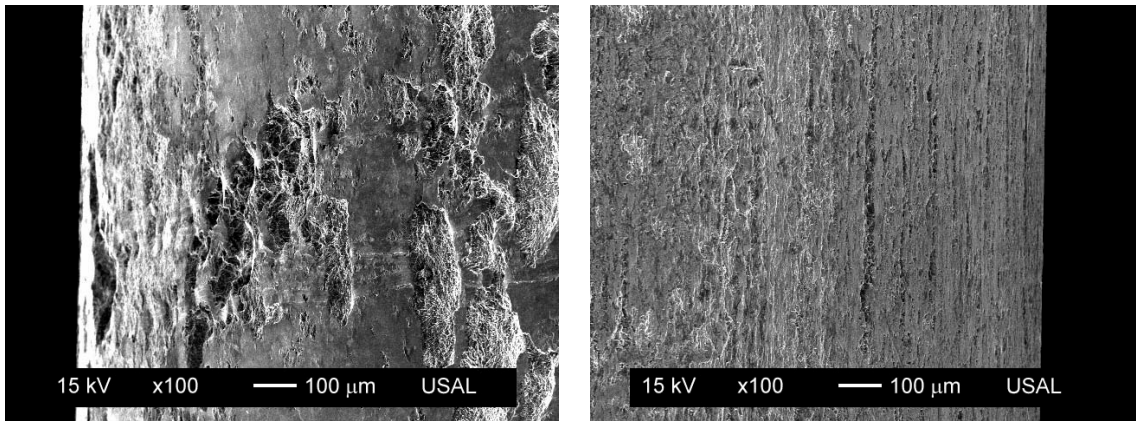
Surface of the material in the two forms: hot rolled bar (left) and prestressing steel wire (right). In both pictures the vertical side is aligned with the wire axis or cold drawing direction
